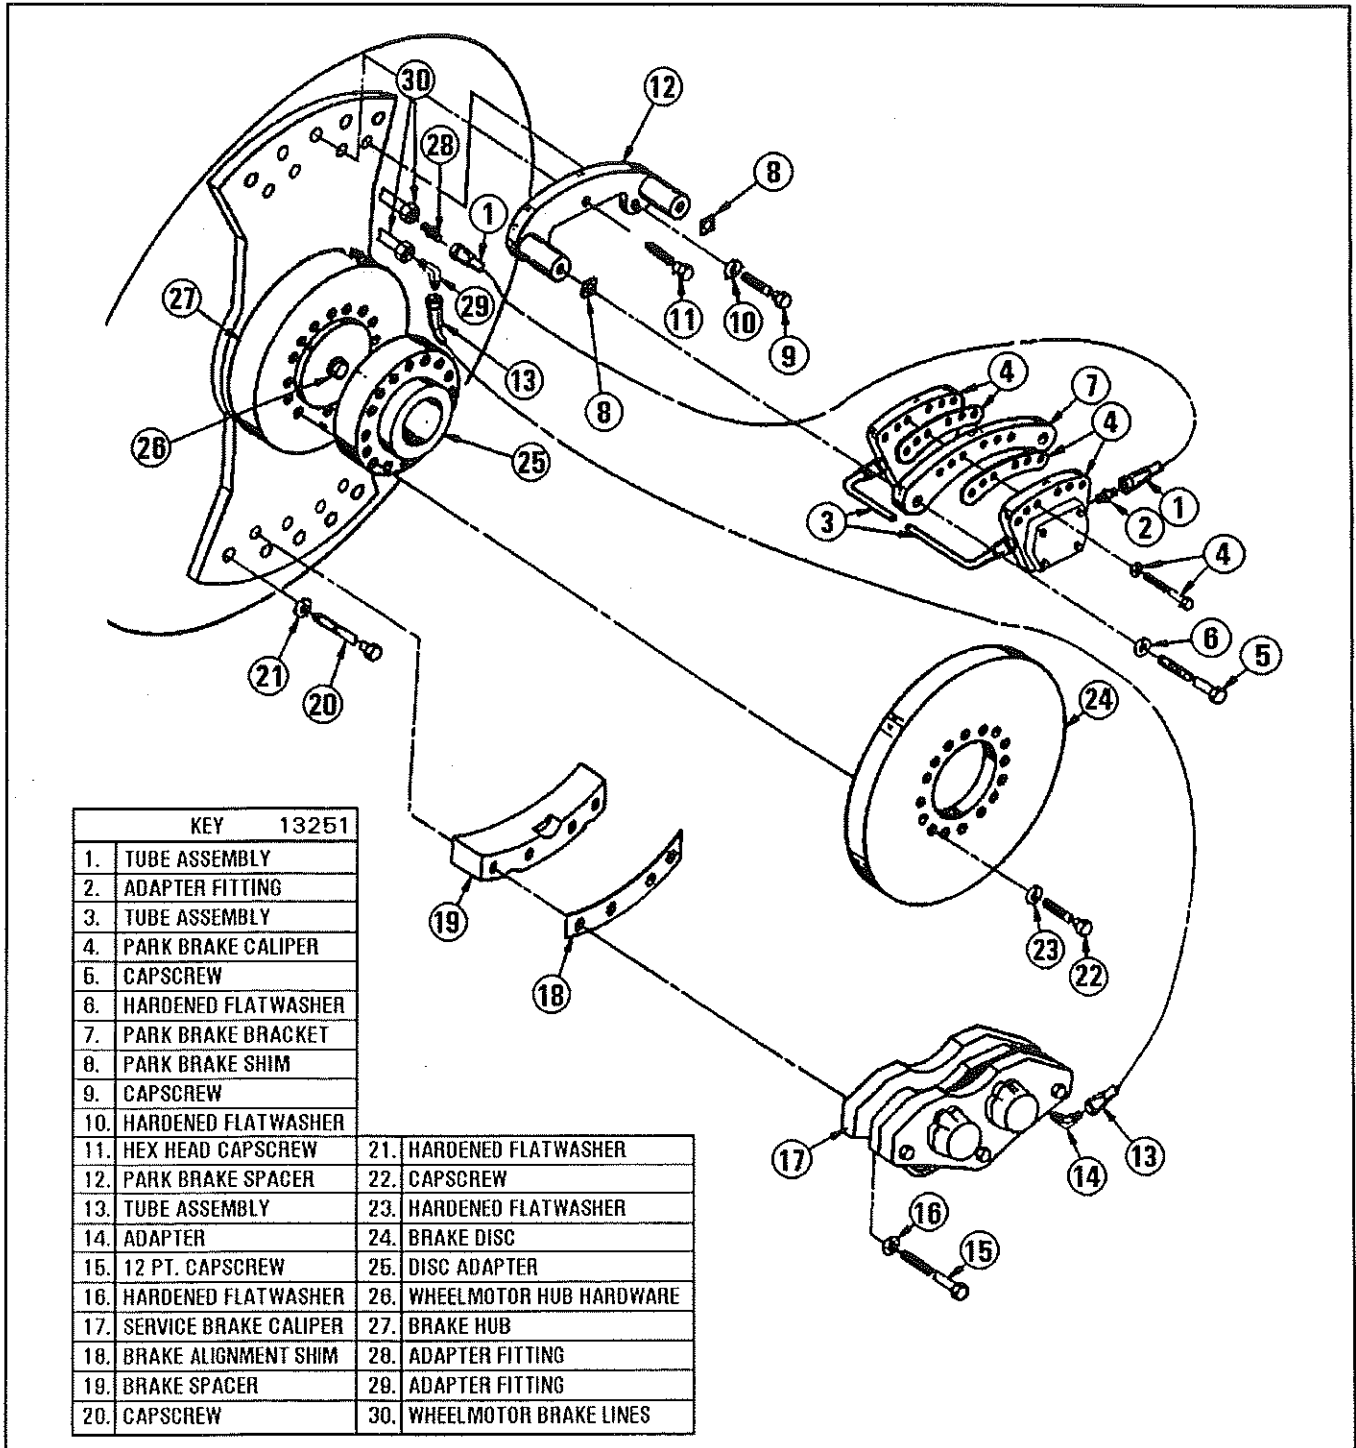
SINGLE DISC REAR BRAKE ASSEMBLY
